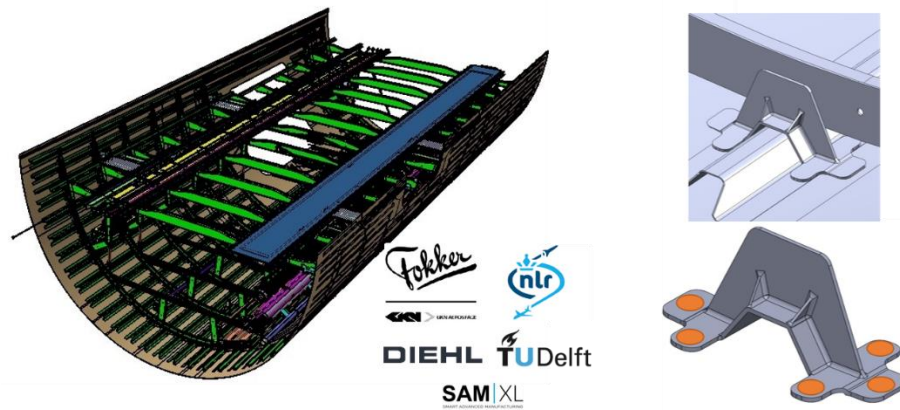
Lower shell of the fuselage demonstrator (left) and clip-stringer-fuselage skin joint with weld locations highlighted (right)
